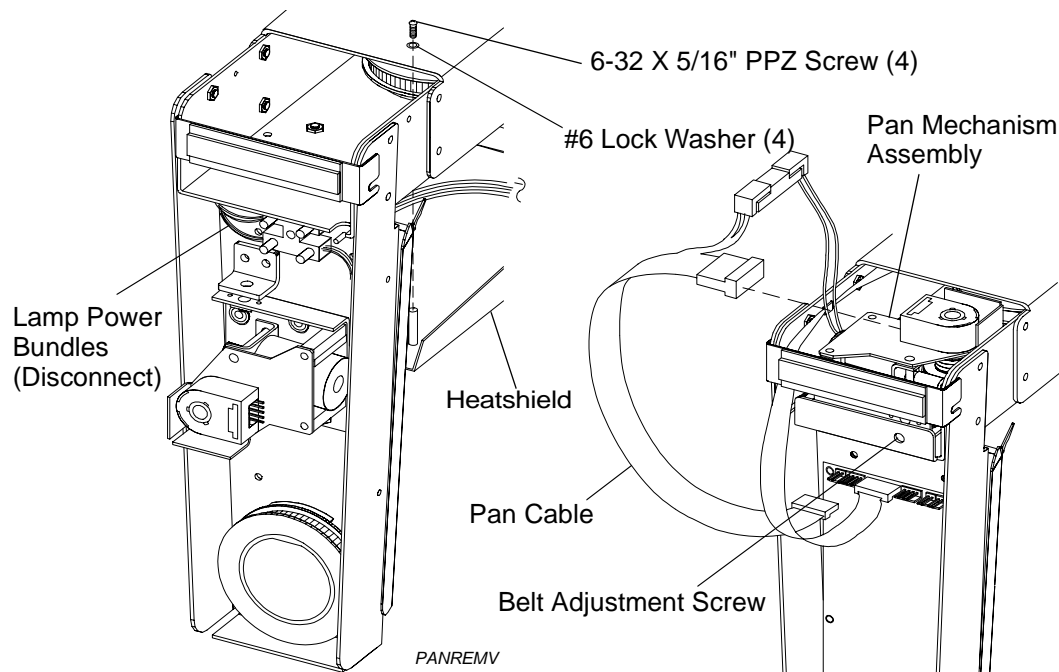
Disconnecting Pan Mechanism Assembly Wires
